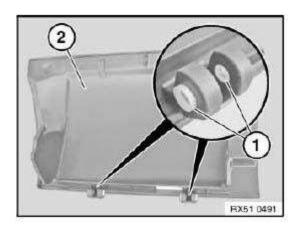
Identifying Lock Courtesy of BMW OF NORTH AMERICA, INC.
